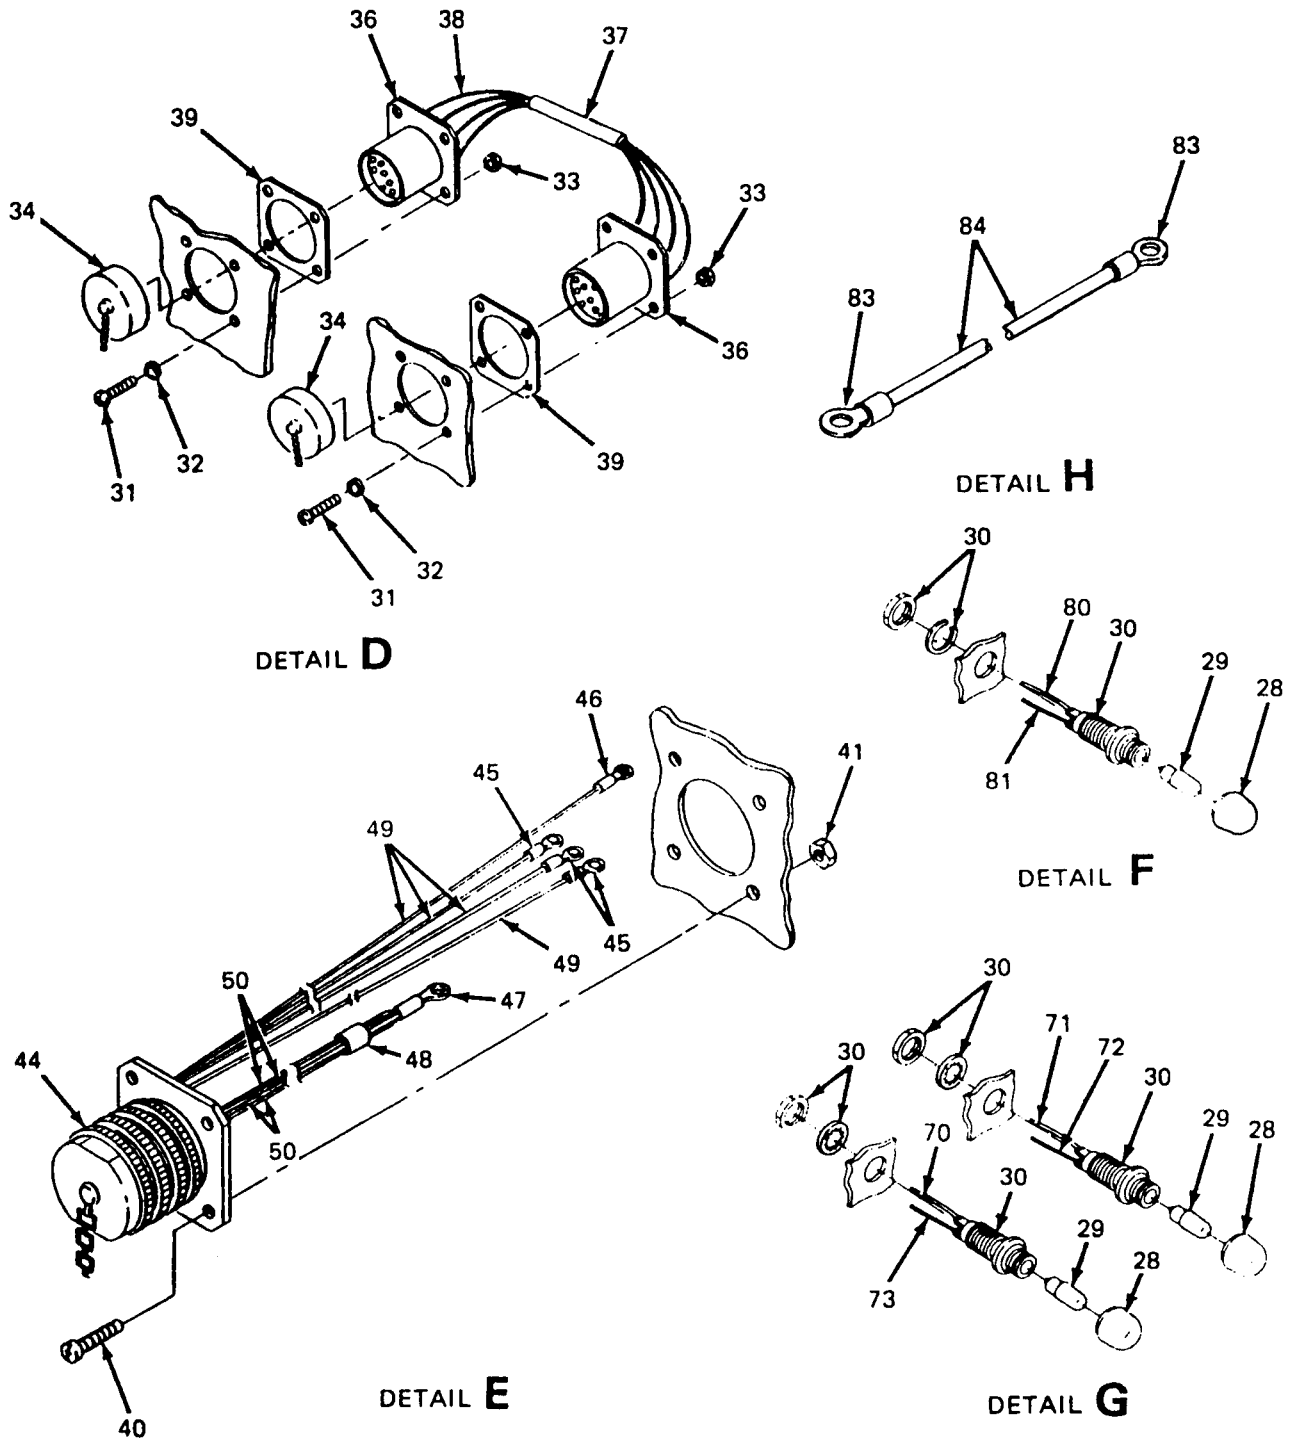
Switch Box Assembly (Sheet 3 of 3).
